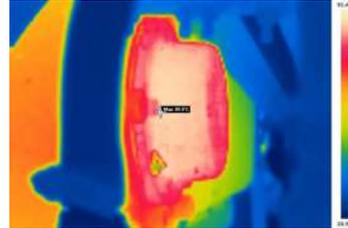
Thermography of Housing External worm shaft bearing drawing machine B.A.C.A 11 #2
